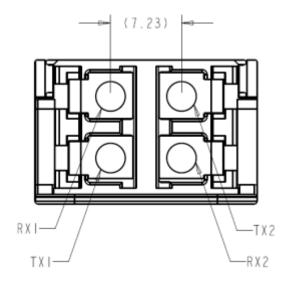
FTCE4717E1PCB Mechanical Dimensions. (Closed Top)
